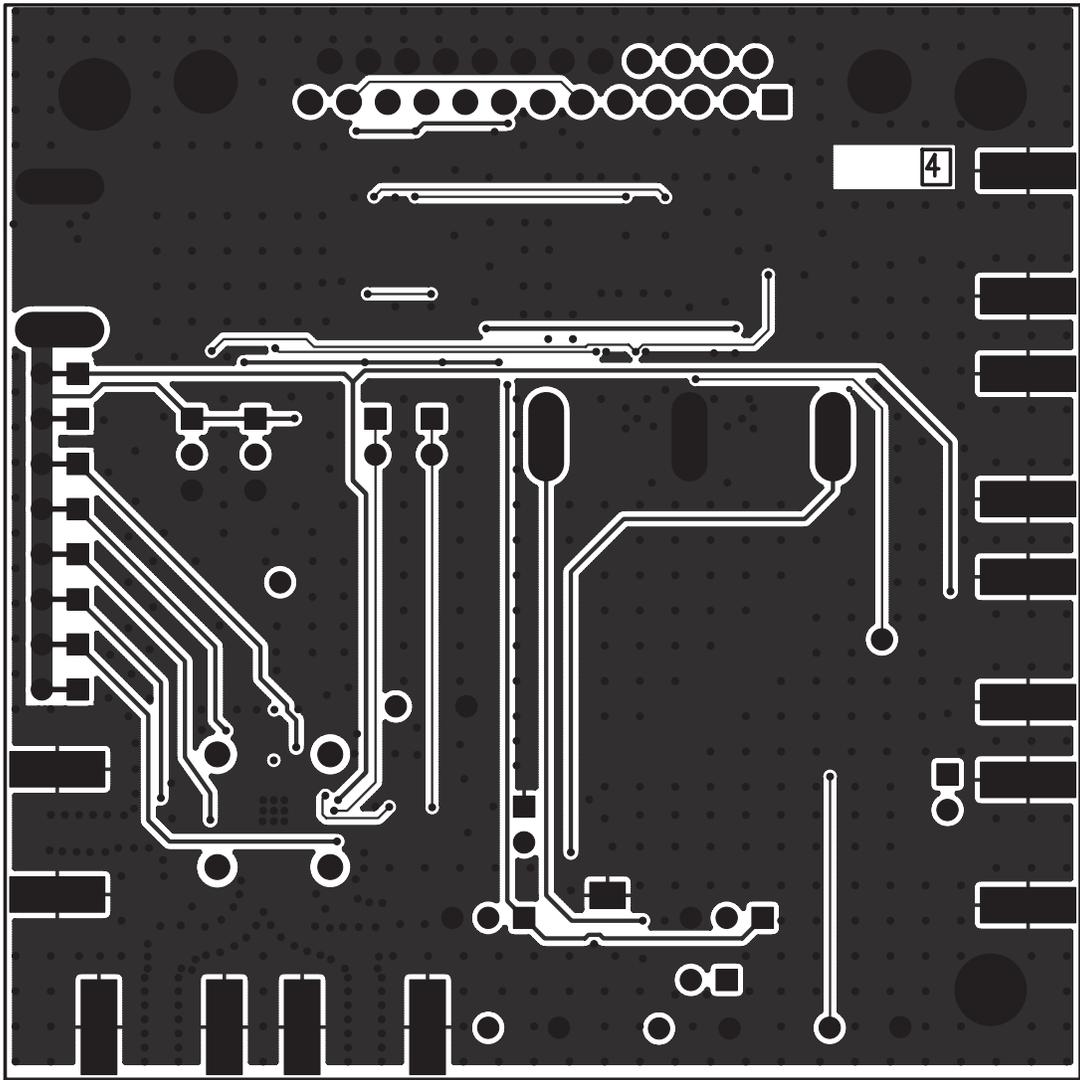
MAX2163 TQFN EV Kit PCB Layout—Secondary Component Side
